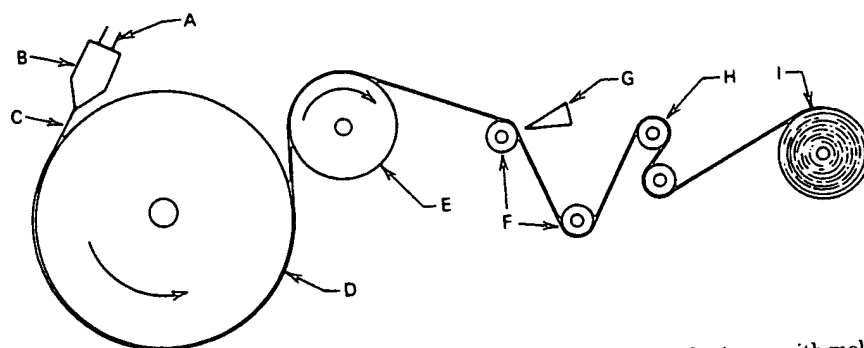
Extrusion of roll-cast film (4). A, die inlet. B, cast-film die. C, air gap with molten web. D, casting roll. E, stripping roll. F, idler roll. G, edge-trim slit. H, pull rolls. I, windup roll. Courtesy of Society of Plastics Engineers.
